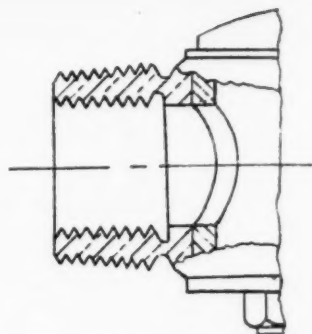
Tapered Iron Pipe Thread for Outlet End of Corporation Stops
